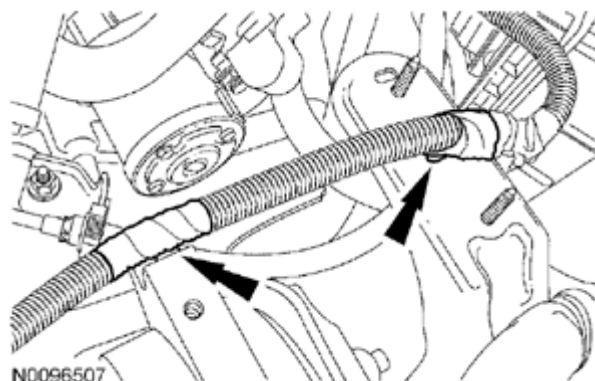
Locating Wiring Harness Retainers Of Battery Tray Bracket And Transaxle Mount
